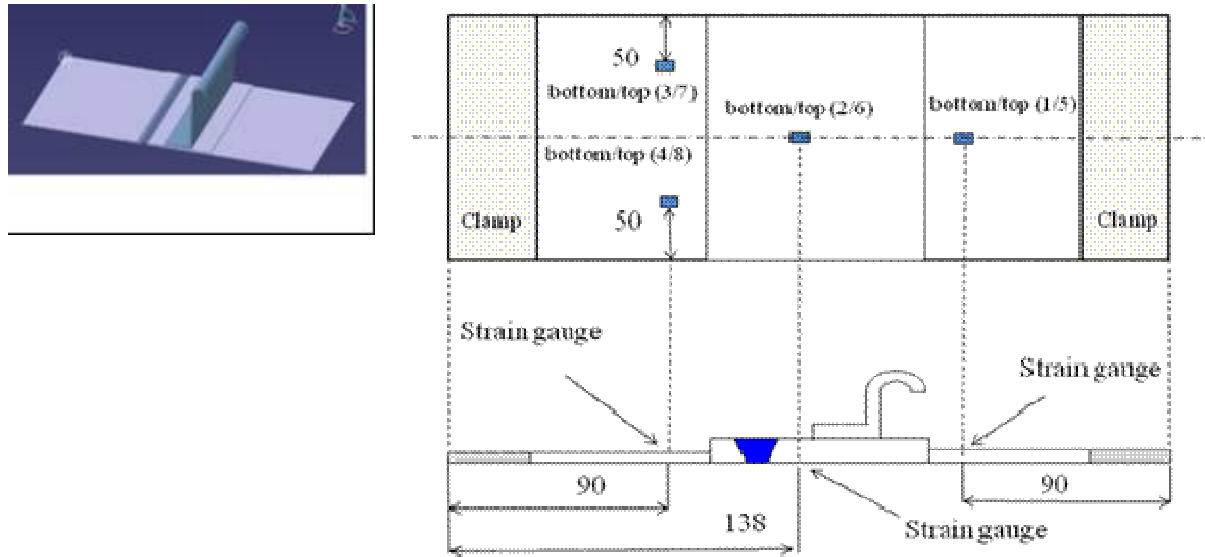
Concept 1 Skin/stringer joint with FSW showing location of FSW and strain gauges
